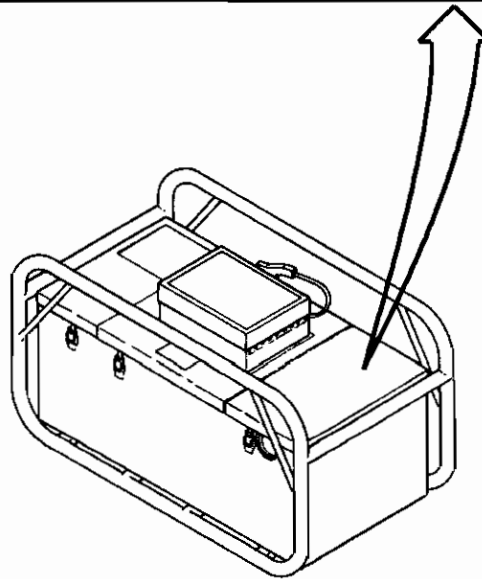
Instruction Plates - Accessory Module (Sheet 3 of 3)
